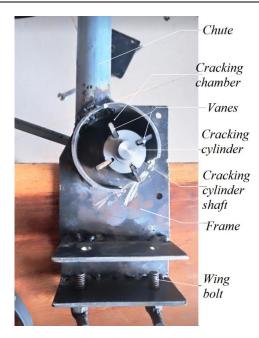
Pictorial views of the fabricated seed cracking machine with Cover plate removed to show the Cracking chamber and Cracking cylinder
